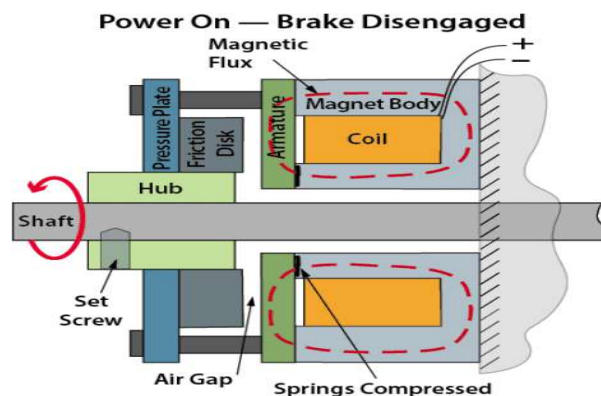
Electromagnetic Braking System (Brake Disengaged)
